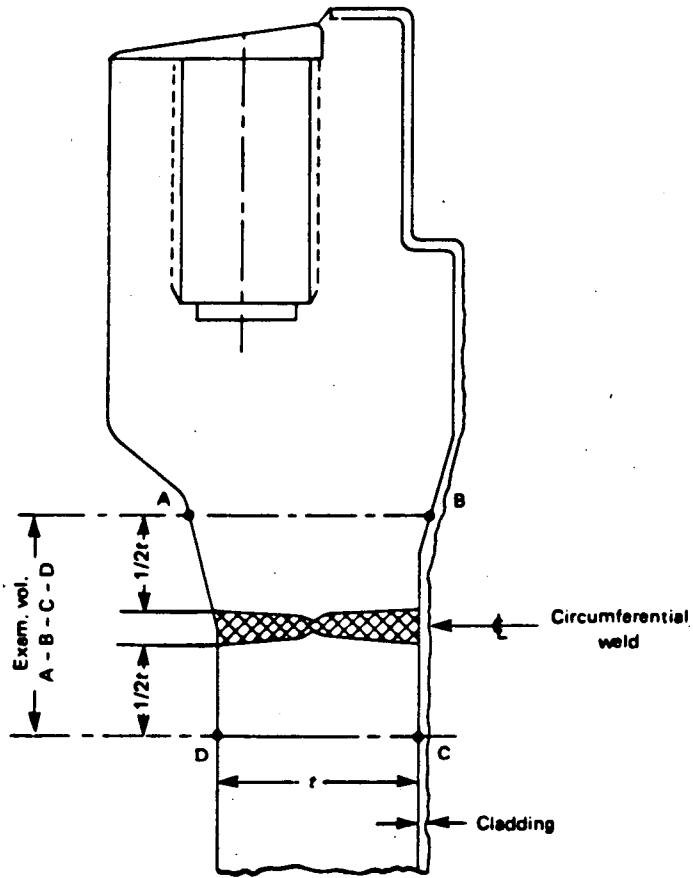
SHELL-TO-FLANGE WELD JOINT
